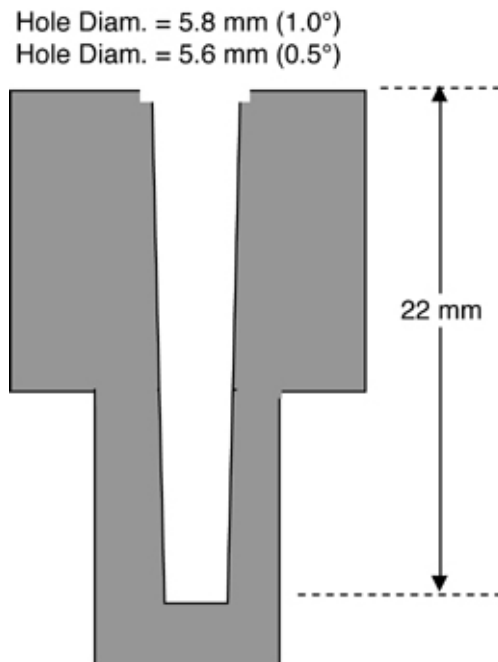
Cross section of nut specimen with blind hole at two draft angles (0.5° and 1.0°).
